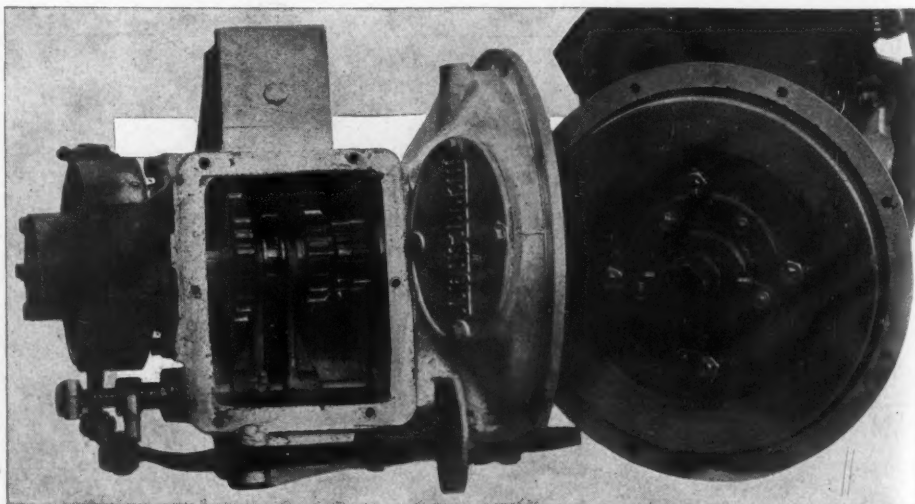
TOP VIEW OF HERRESHOFF GEARSET AND CLUTCH
